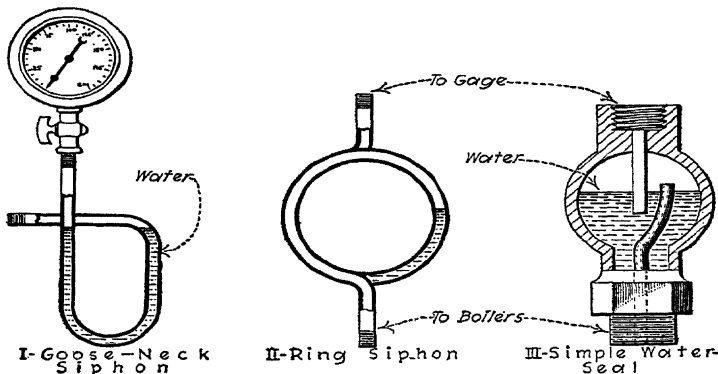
Typical gage siphons used with Bourdon-tube steam pressure gages.
